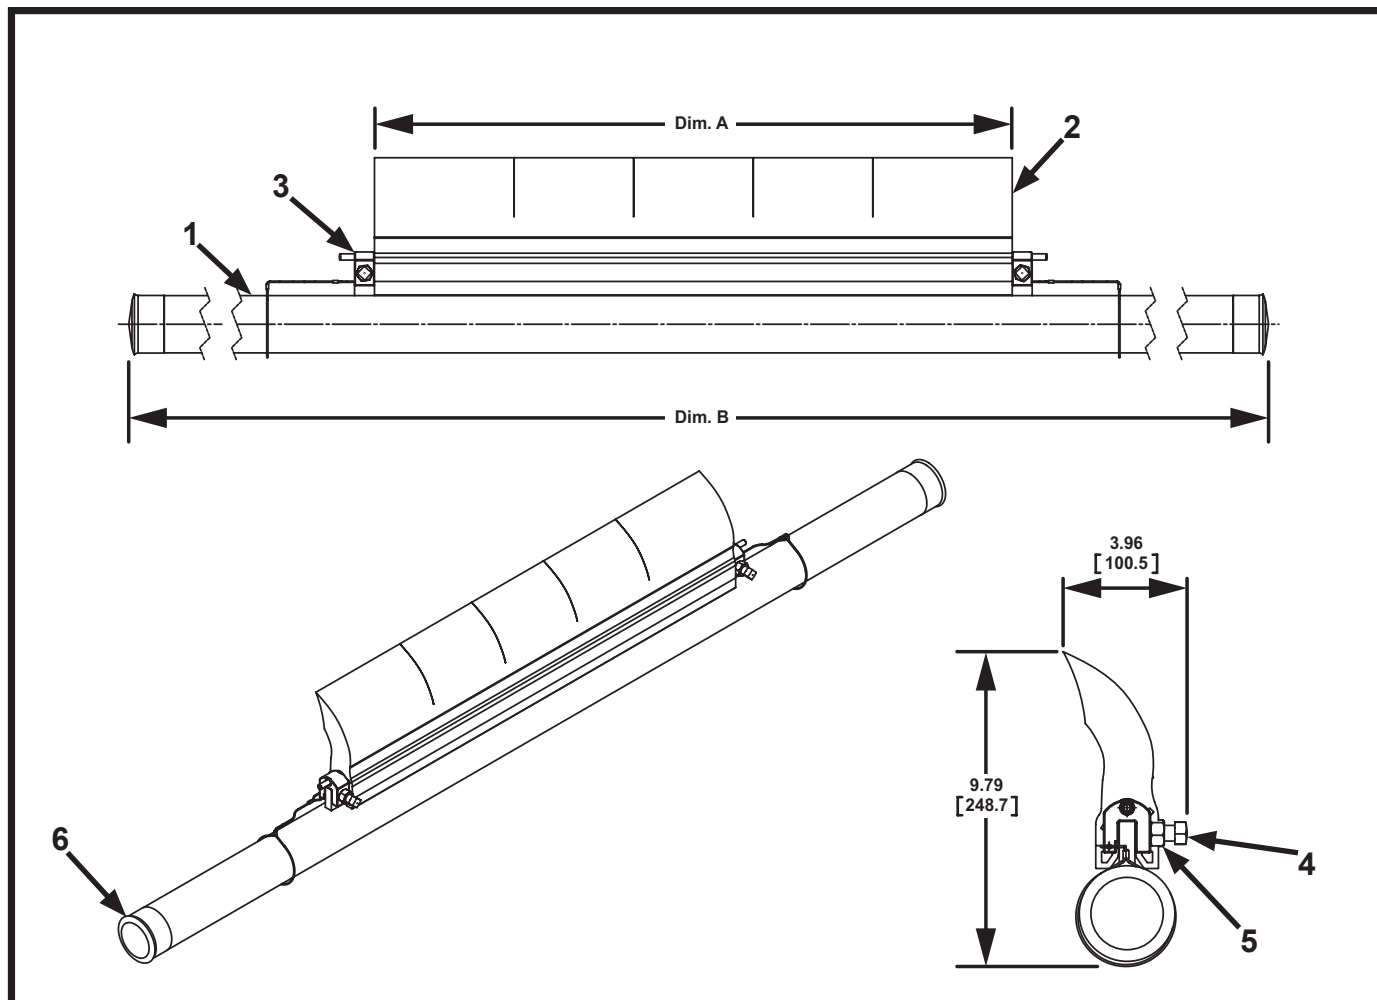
Martin® QC1+™ Cleaner PD Assembly, P/N C1QCF1SXXSXXXXXX
